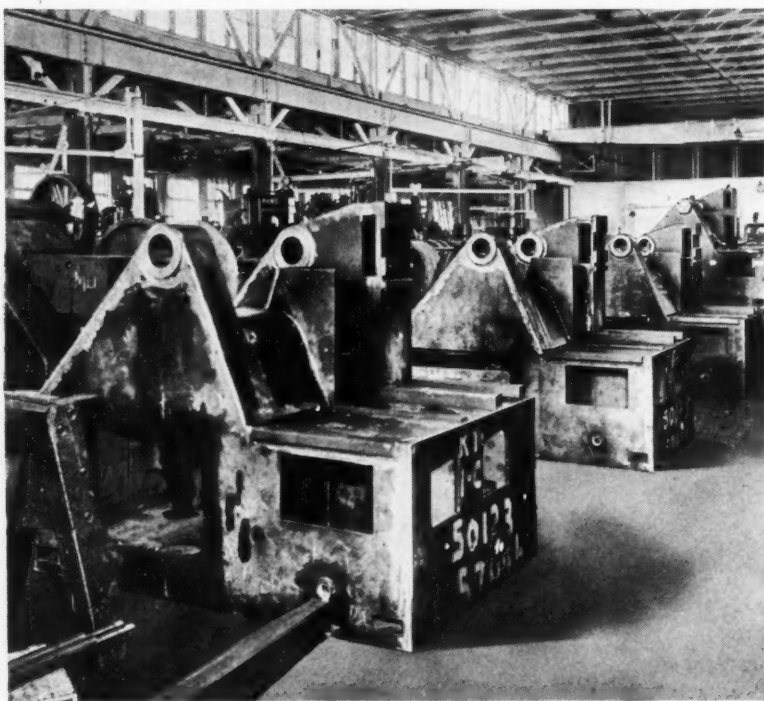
Welded Housings for Metal-cutting Saws
